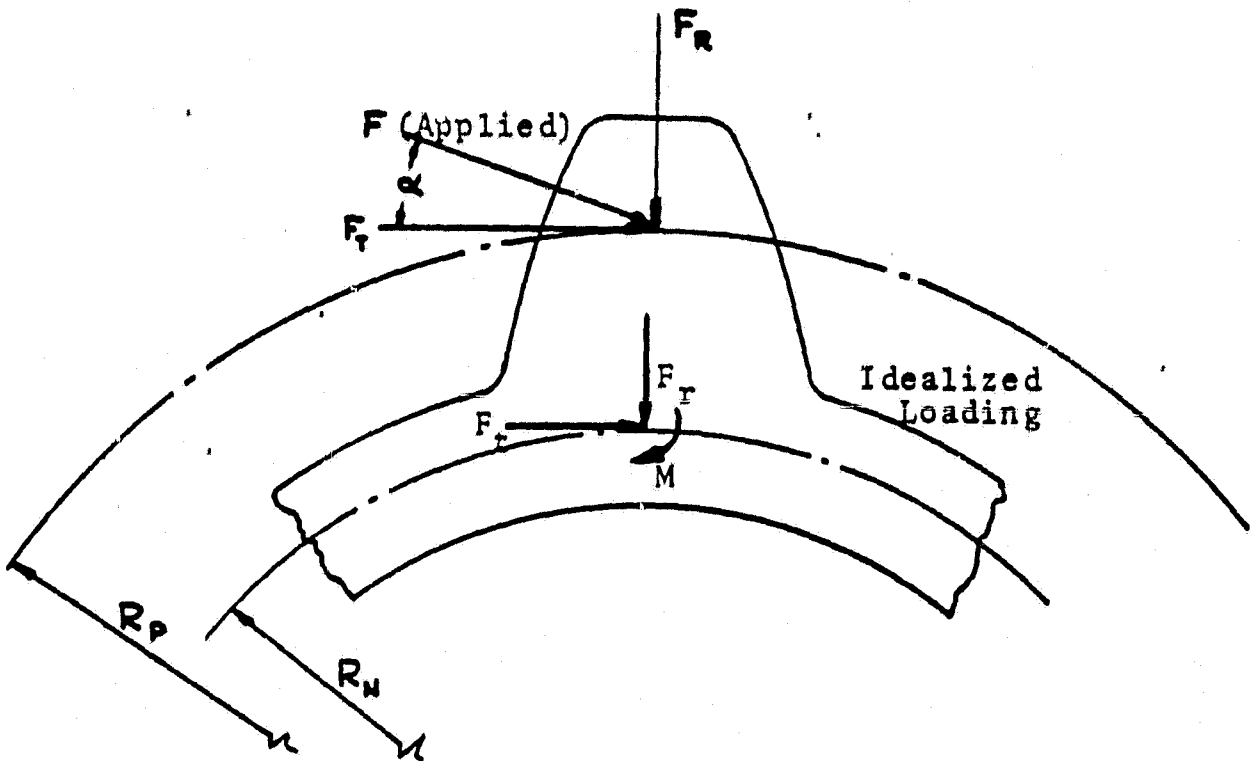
IDEALIZED GEAR TOOTH LOADS
